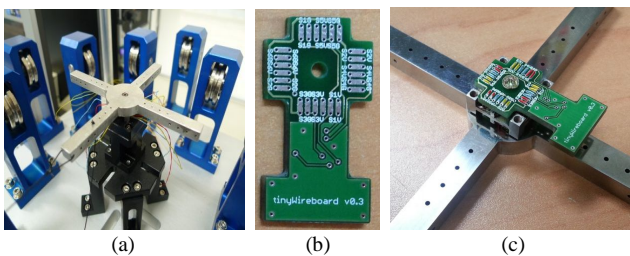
Calibration jig connected by many signal wires (a), a wiring board for more easy and convenient wiring (b), and a sensor frame module wired by using the wiring board (c).
